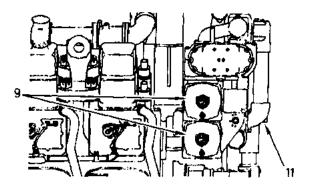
(9) Engine oil filters. (11) Engine oil filter change valve.
